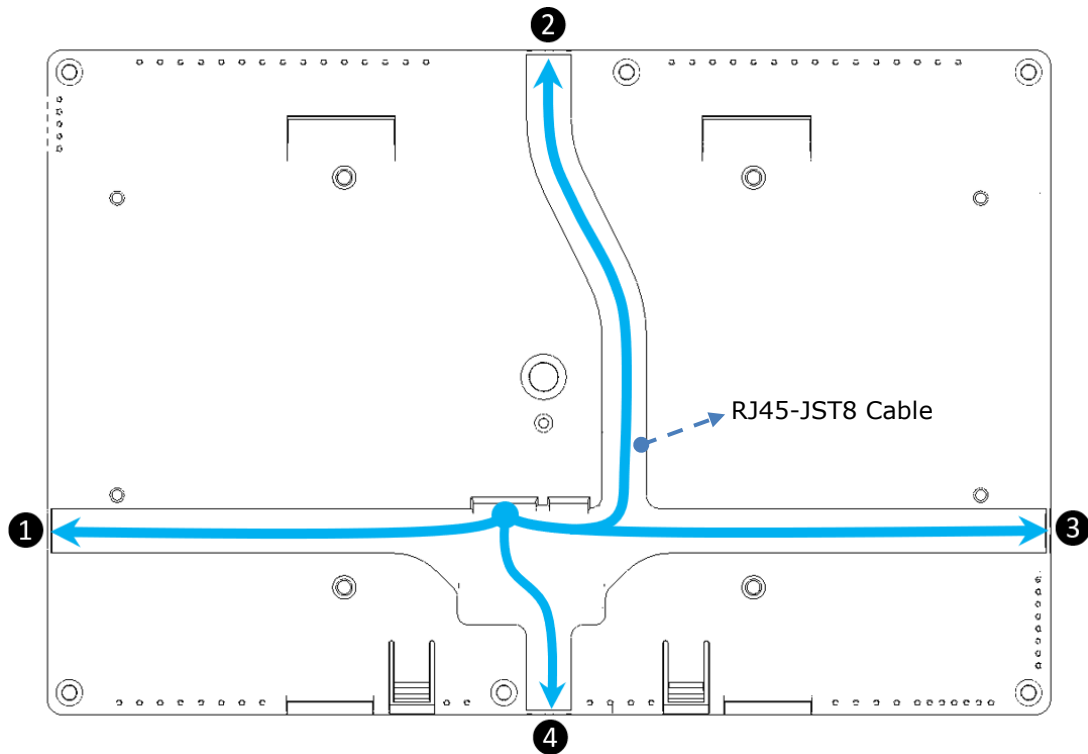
RJ45-JST8 Cable Wiring Direction Options
